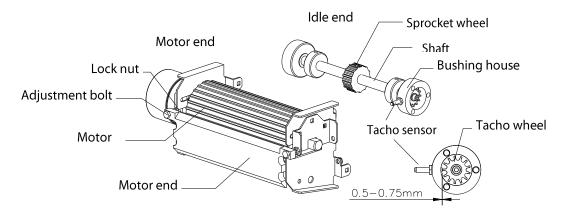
Details of the Compact Grader, motor unit and tacho sensor
